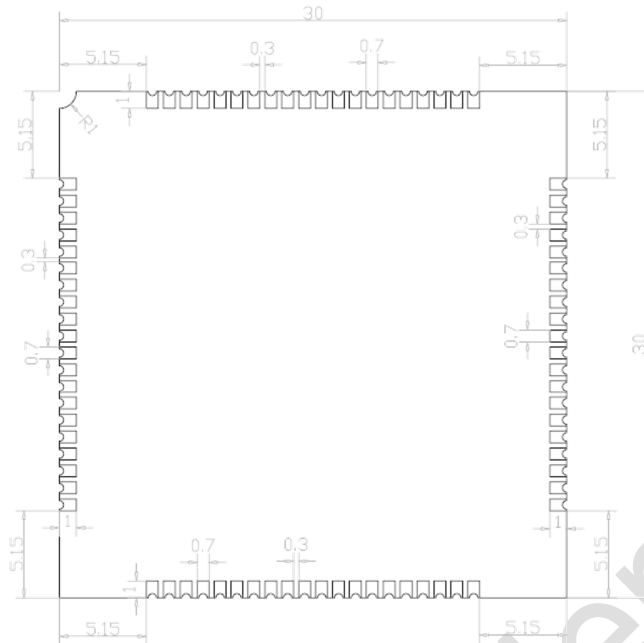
Recommended Welding Panel Design Dimension of Customer Interface Board
